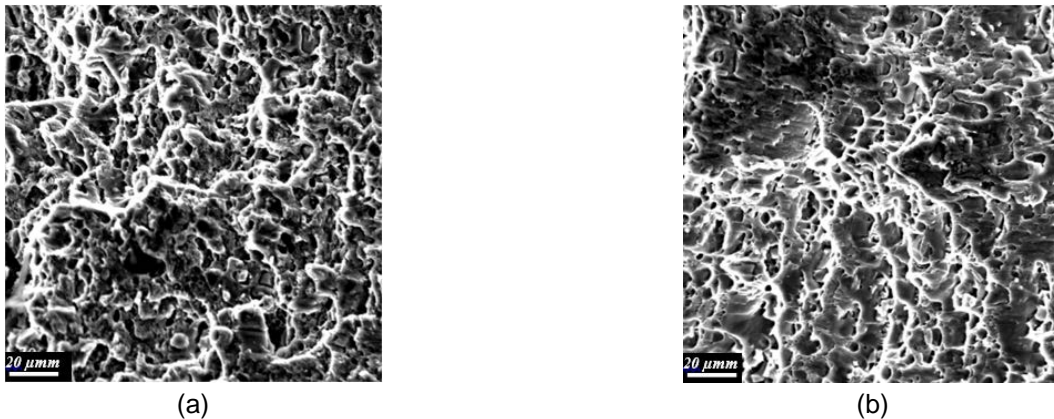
SEM micrographs of disc pressure tests fracture surfaces for (a) the welding joint, (b) the BM,
